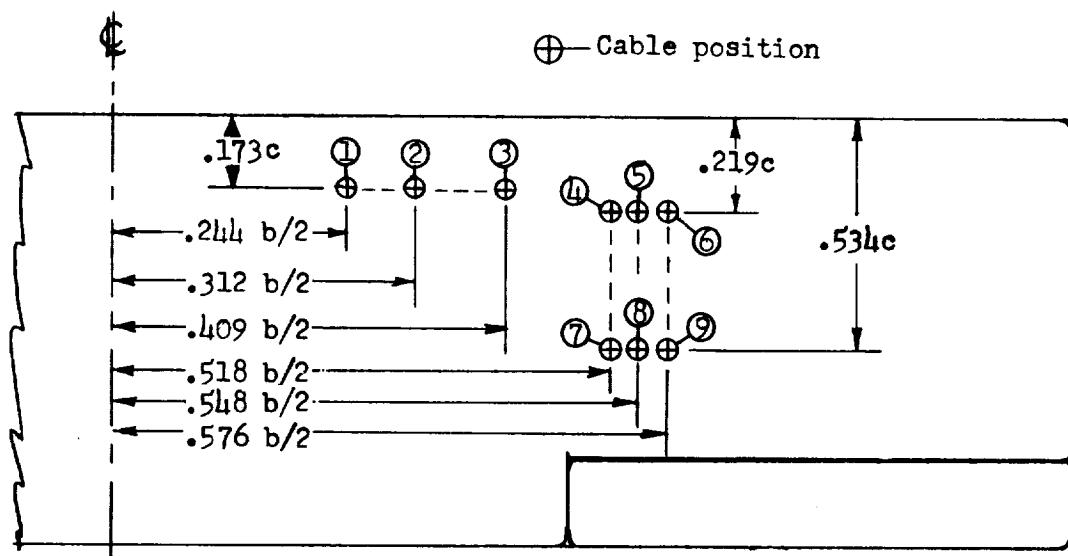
Guy-cable attachment on wing lower surface. View is from above right-hand wing.
